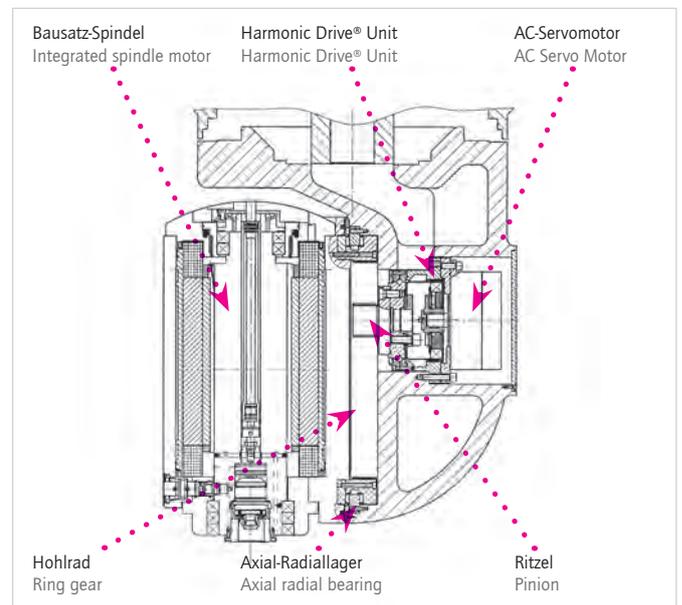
shows the C-axis in a machining centre for large turbine components. This arrangement offers enormous advantages with regard to torsional stiffness, machining accuracy and dynamics. It is fitted with electrically clamped actuators, comprising the Harmonic Drive® Units from the HFUC-2UH and CHM Servo Motor Series. The machine's cutting power is up to 30 kN and the control varies the load torque to match the type of operation.
